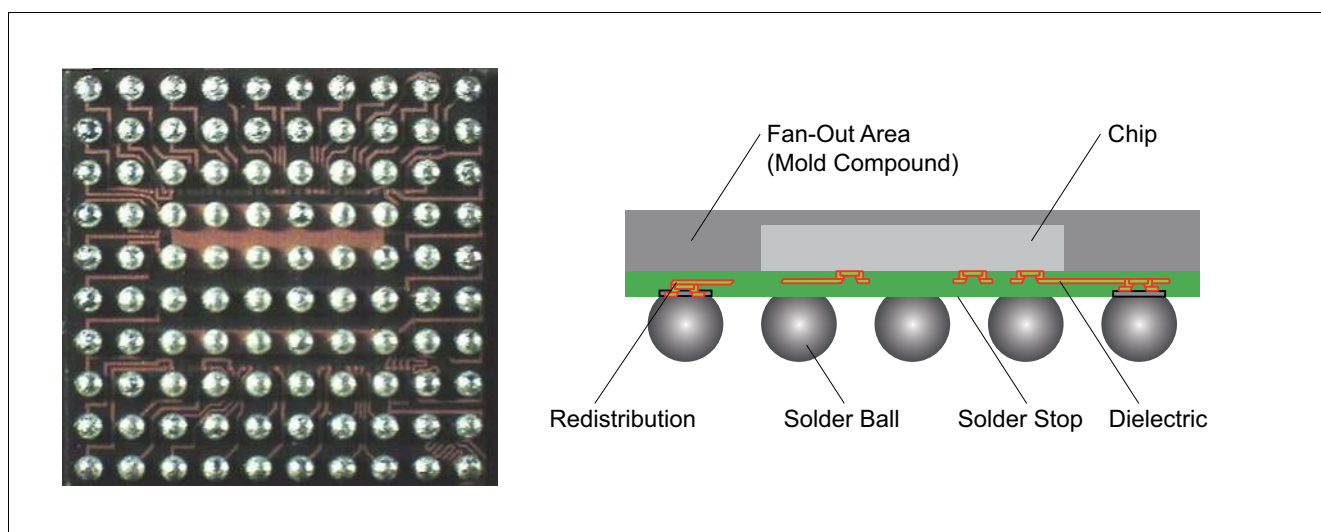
Photo and Schematic Cross Section of Typical PG-WFWLB
